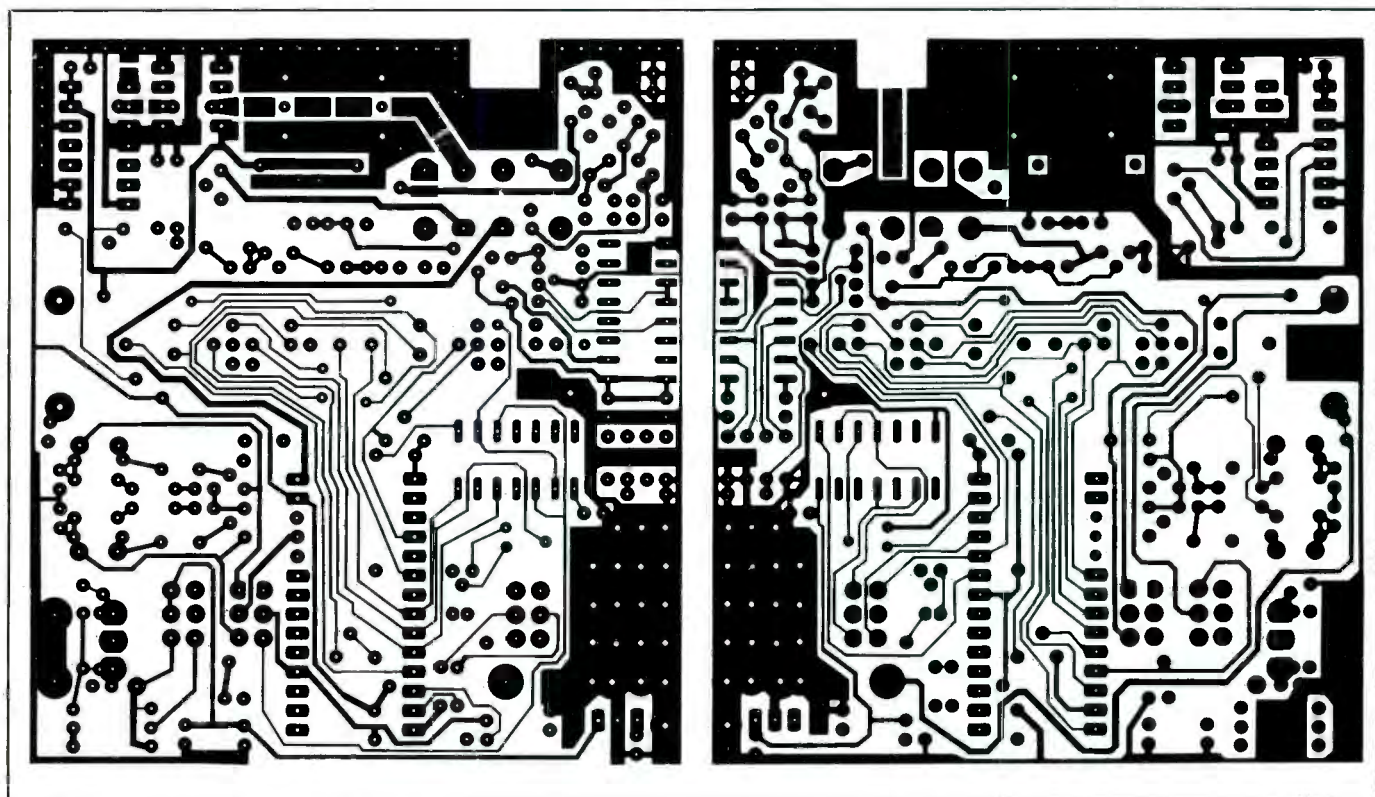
Actual-size top (left) and bottom (right) etching- and-drilling guides for project's printed-circuit board.
